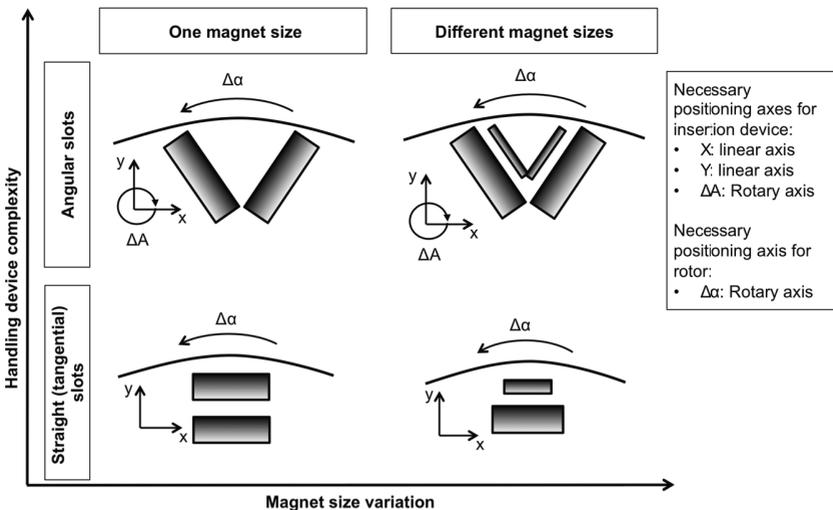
IPM rotor - magnet configurations and the necessary axes-configuration
